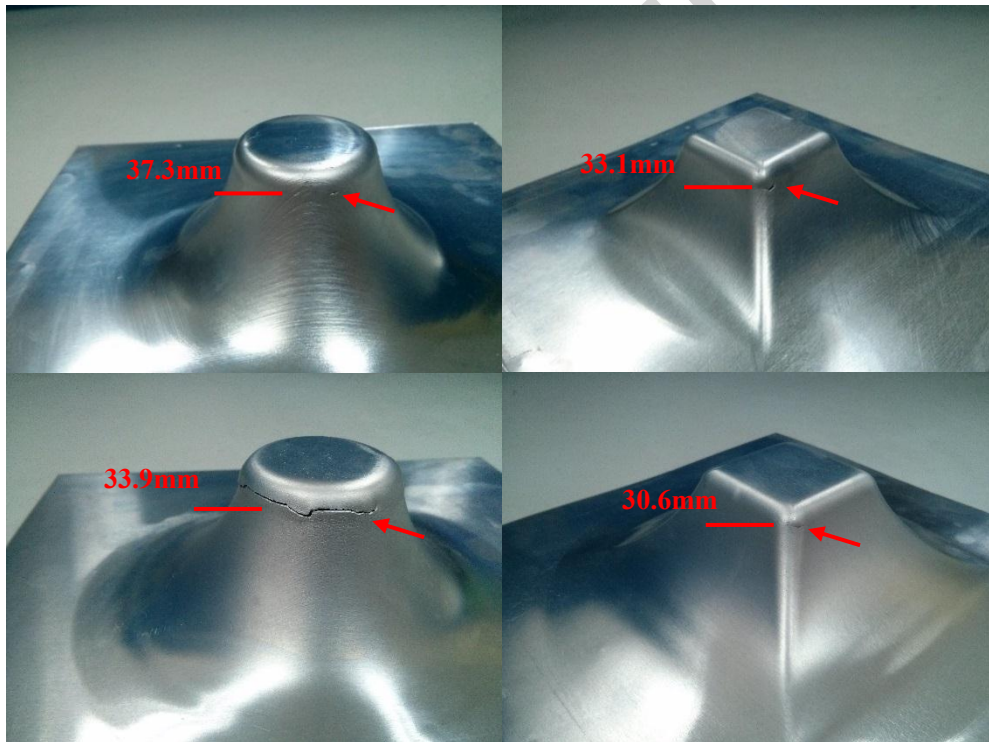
Macroscopic view of fractured parts: (a) AA1100 cone; (b) AA1100 pyramid; (c) AA5052 cone; (d) AA5052 pyramid
